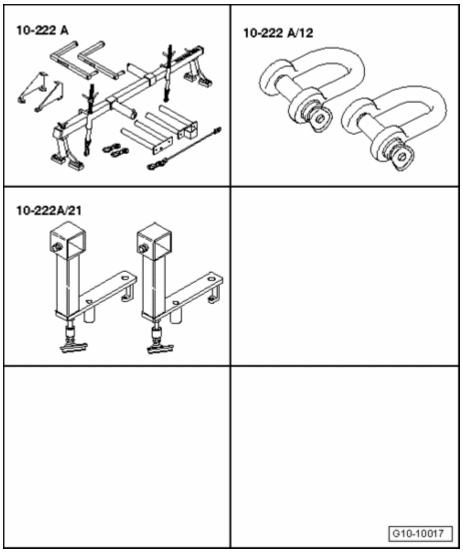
Removing/Installing Sealing Flanges For Camshaft Adjuster On Left/Right Covers For Timing Chain
